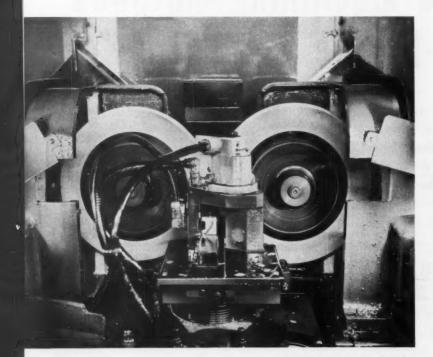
Fir-tree serrations are being formed on the dovetailed blade end on a vertical form grinding machine. Cast block, containing the blade, serves as a locating fixture.
